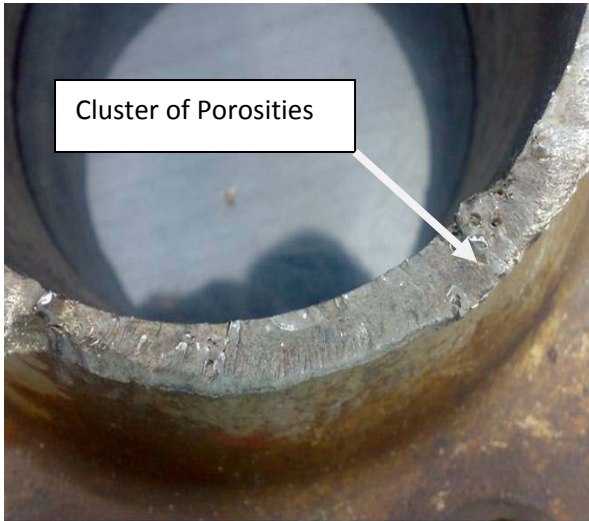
Failed PSV Weld neck flange showing porosities
